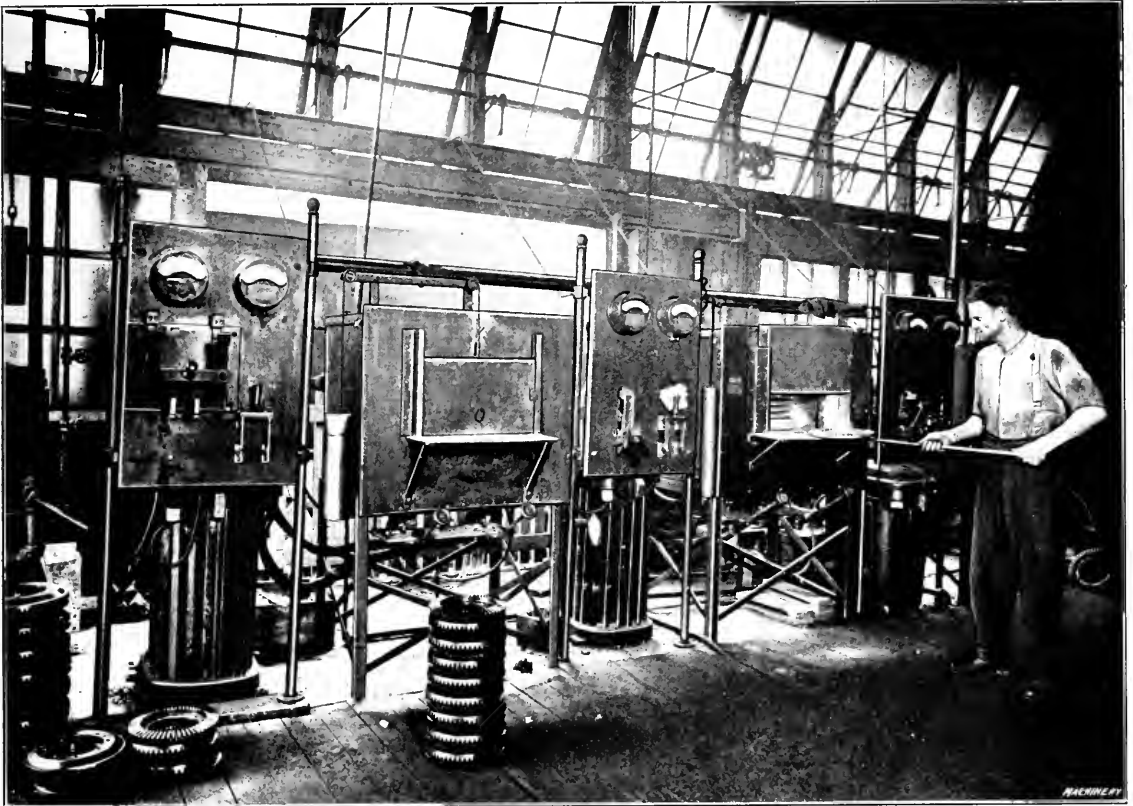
Battery of Hoskins Electric Hardening Furnaces
